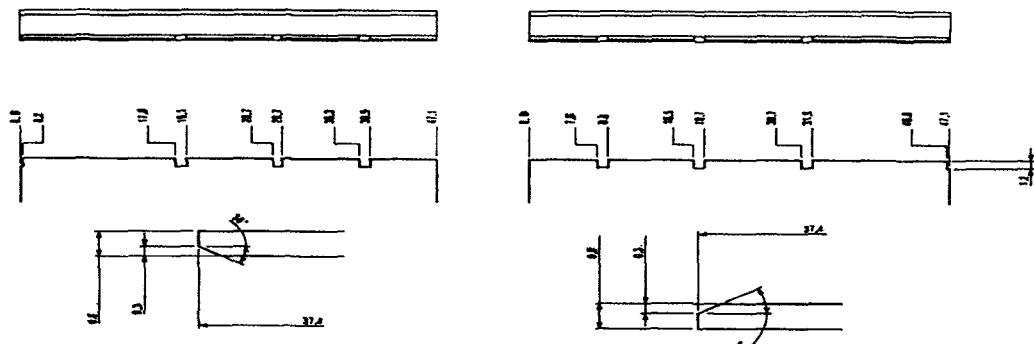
Generated detail drawing of side bending punch for specimen 3
